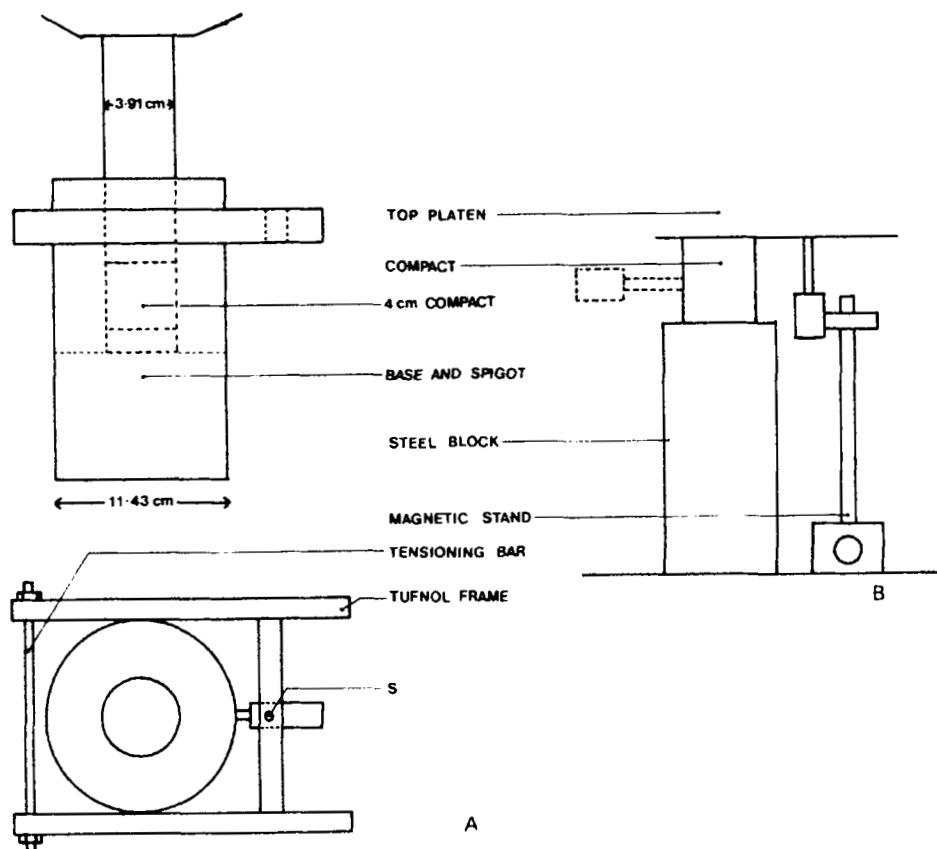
A The punch and die assembly FIG. 1B Loading of free compacts
